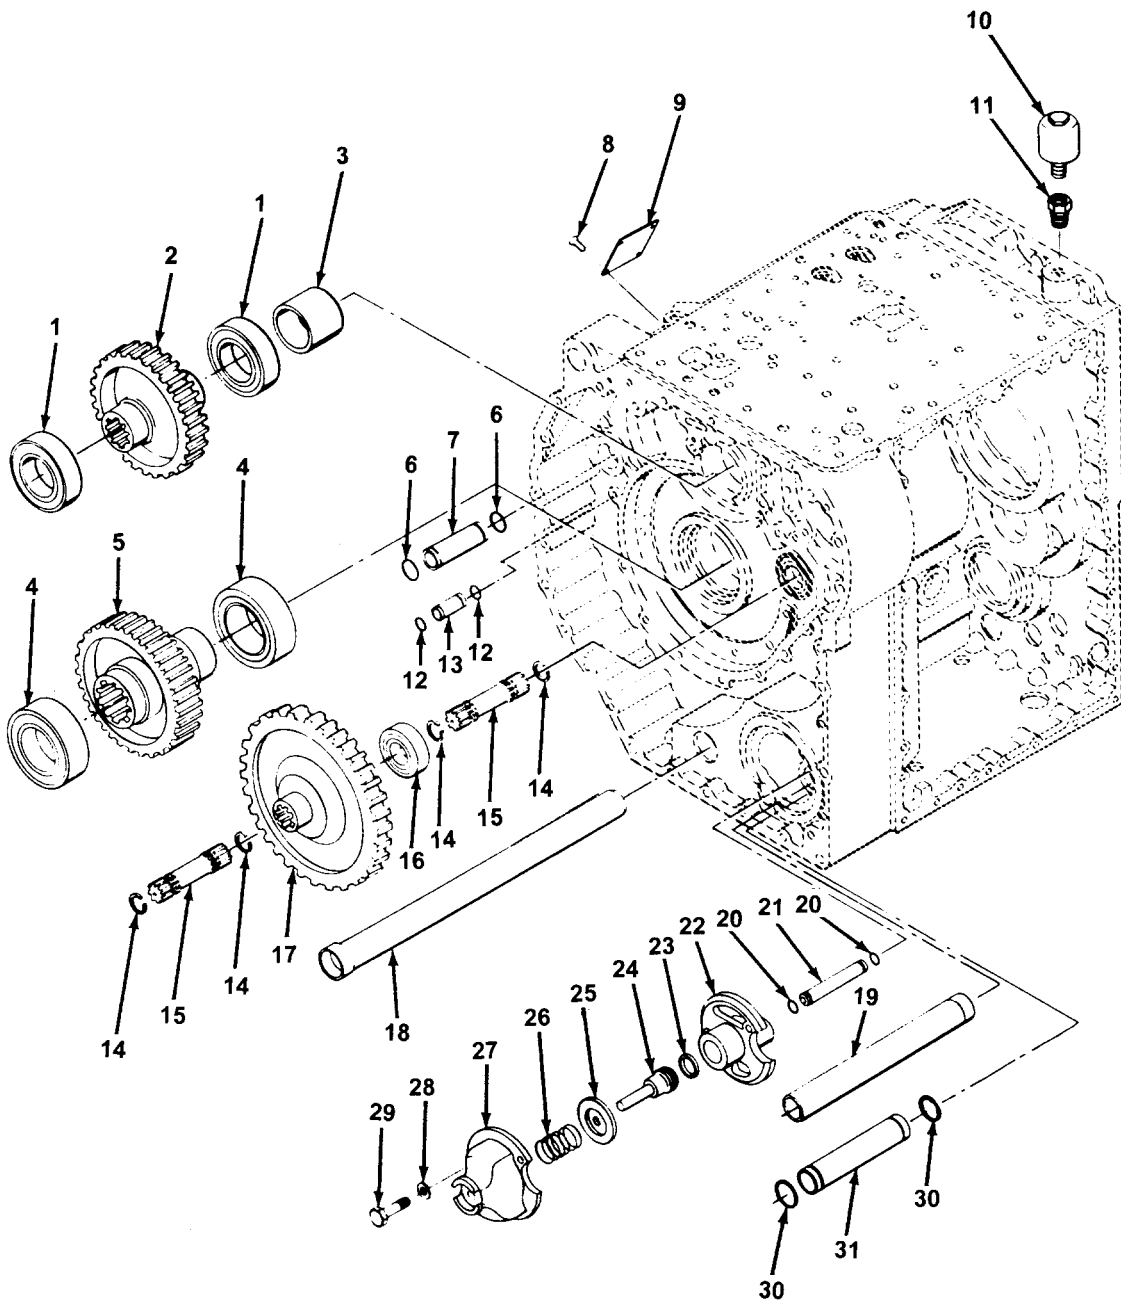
Output Drive Gear and Steer Shaft Drive Gear.
